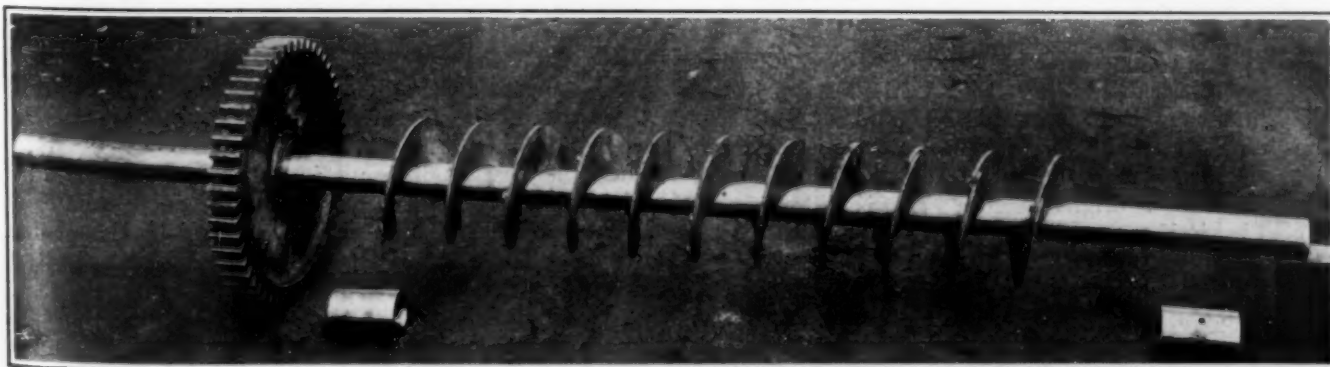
Screw Feeder for Carrying Cement Clinker to a Tube Mill
